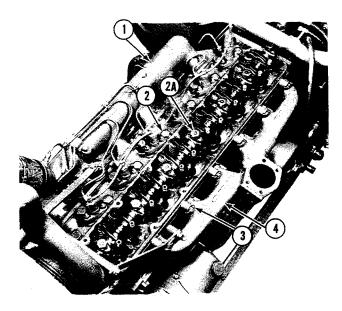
Top View of Engine 1. Intake Manifold 2. Head Bolt 2A. Head/Rocker Arm Bolt 3. Lock Tab 4. Exhaust Manifold
